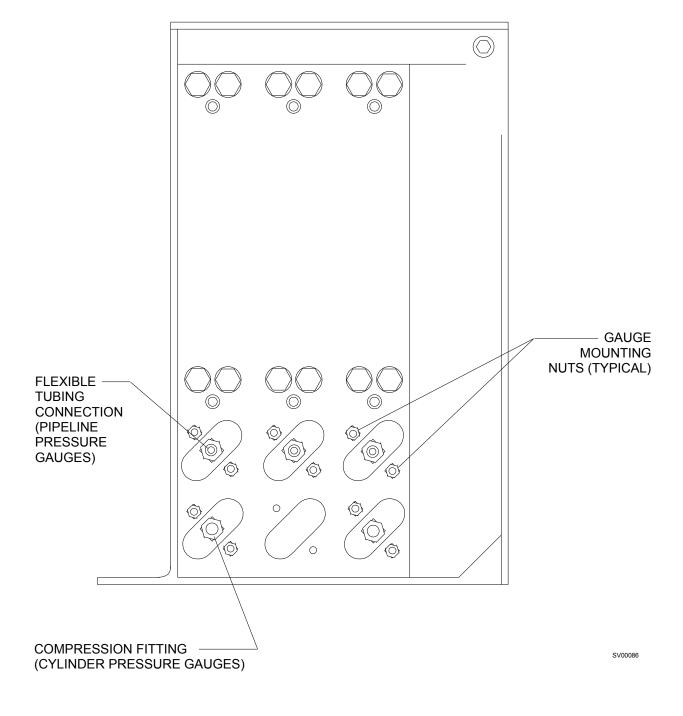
Cylinder and Pipeline Pressure Gauges
